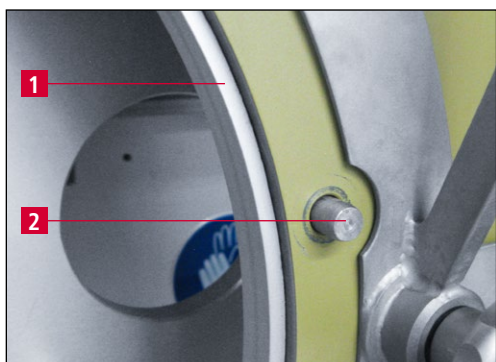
Centering bolt of the cam plate in centering hole of the knife
